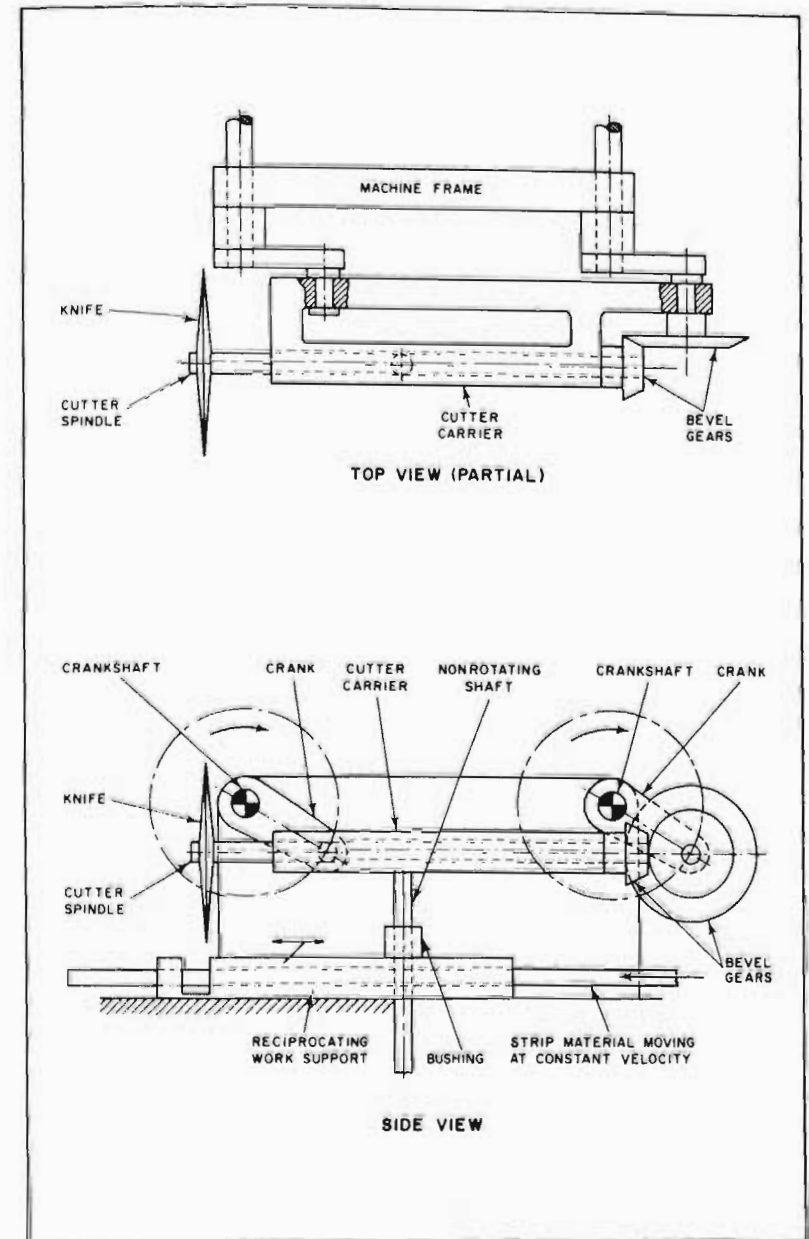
Stock cut on the fly by knife rotating in a circle.
